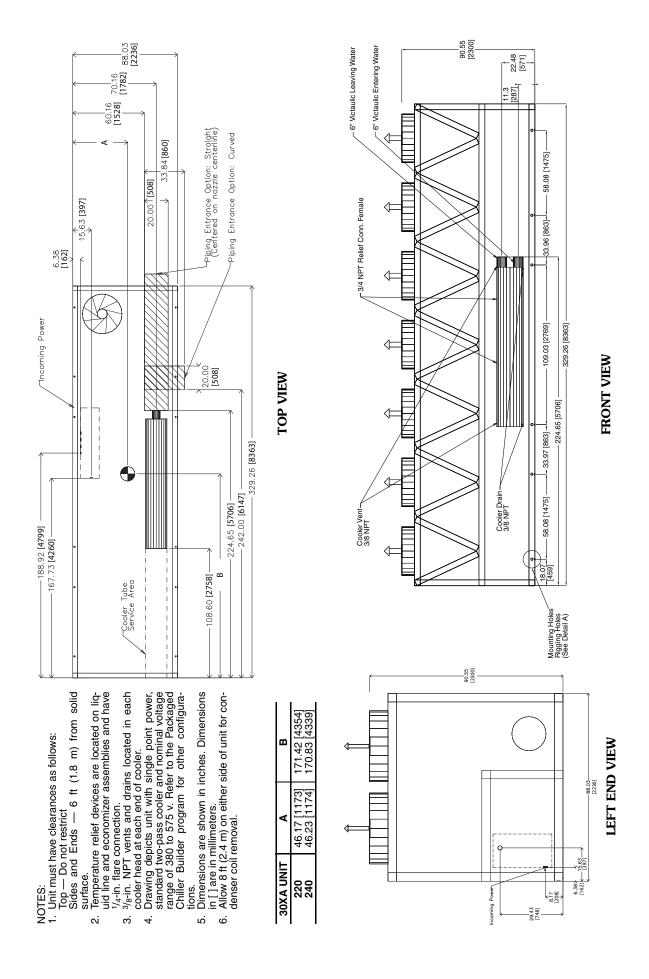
30XA220,240 Air-Cooled Liquid Chiller Dimensions
